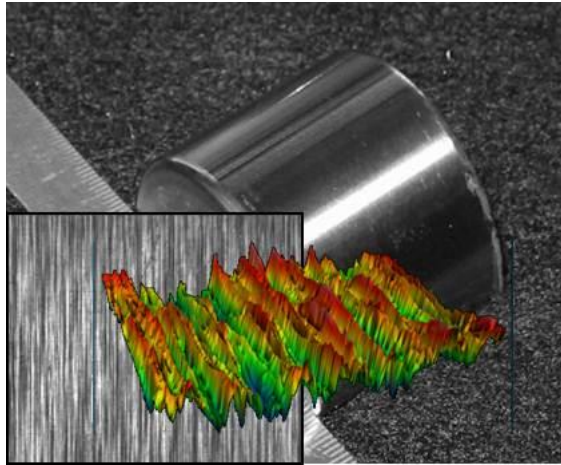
Conventional surfaces produced by grinding and machining exhibit positively skewed non-isotropic surfaces such as the three views seen in this figure. (Photo courtesy of Jack Clark, Surface Analytics, LLC)
